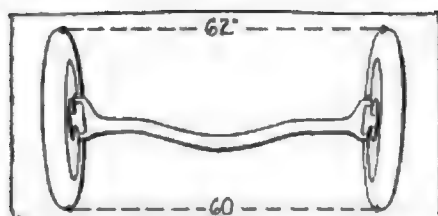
FRONT VIEW OF SPREAD WHEELS
